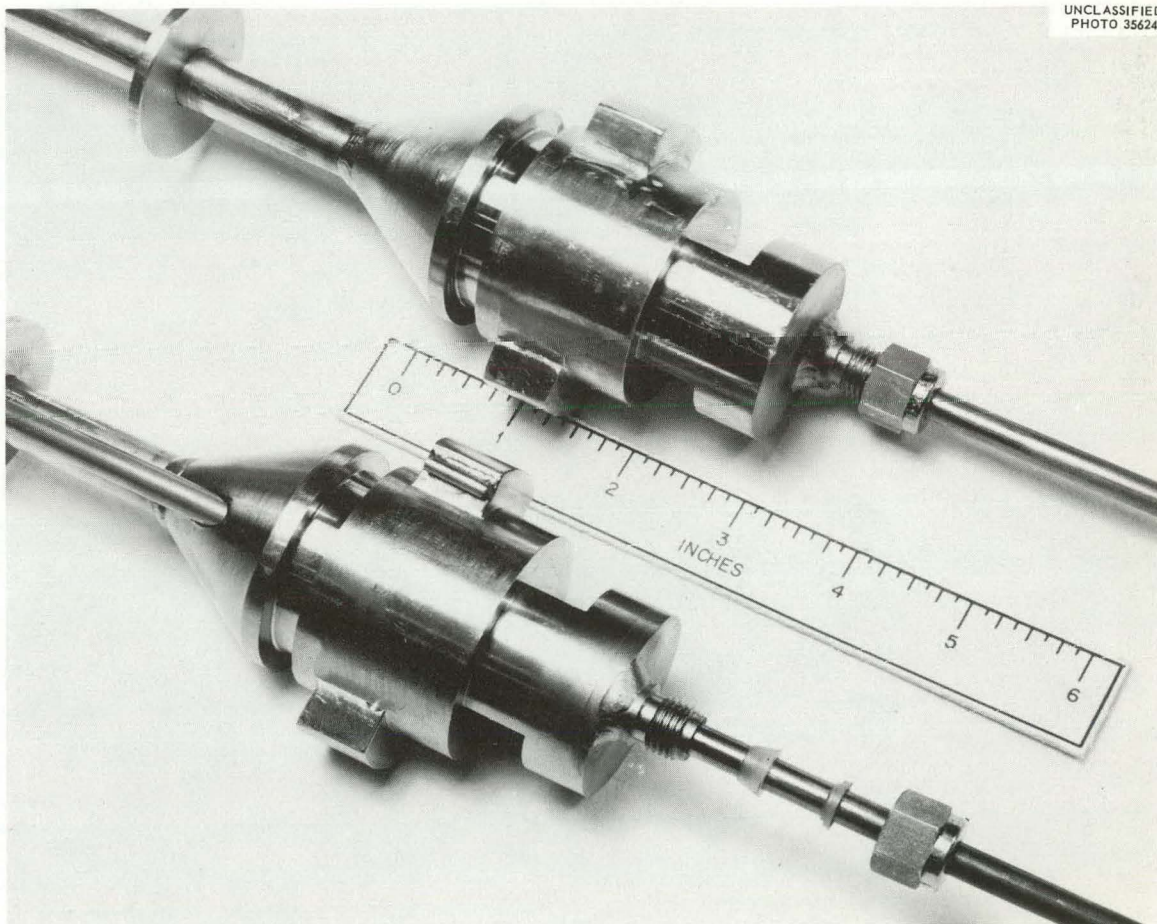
Upper Ends of Test Specimen Supports and Pressure Seal Closures Showing Thermocouple Pressure Seals and Backup Packing Glands.
